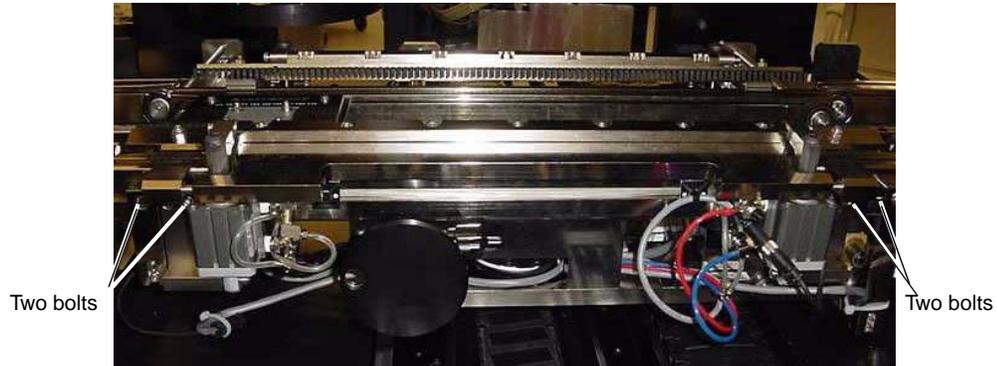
Conveyor Top Clamp Assembly Bolt Locations
